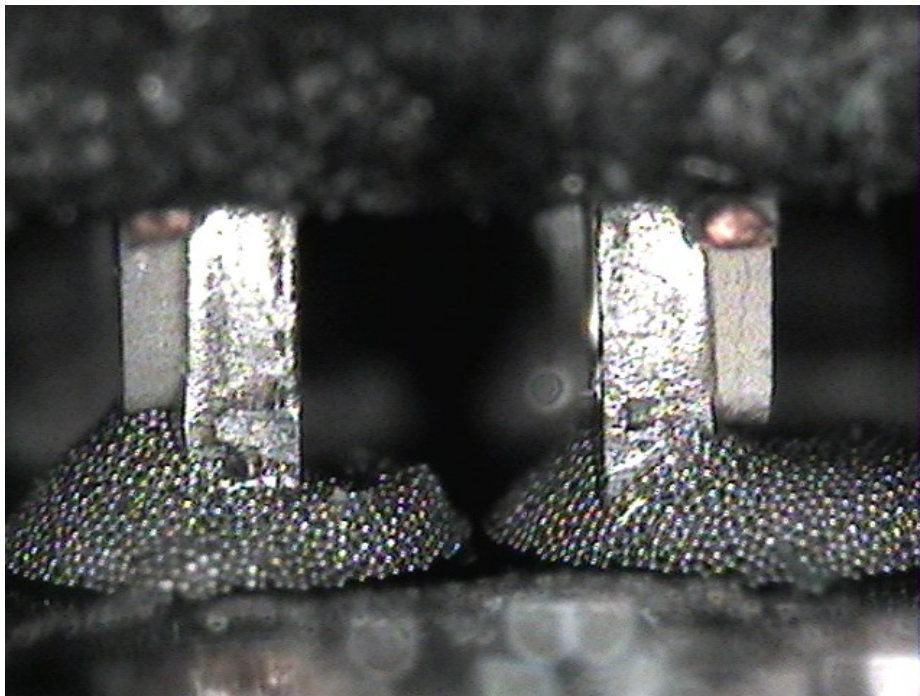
Solder charge location relative to solder print. Notice good contact between solder charges and solder paste. Solder Charge相对于锡膏的位置。注意Solder Charge与锡膏的良好接触
